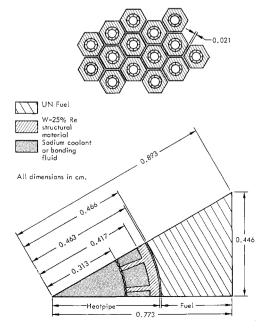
30° segment of hexagonal heatpipe—fuel pellet assembly.
